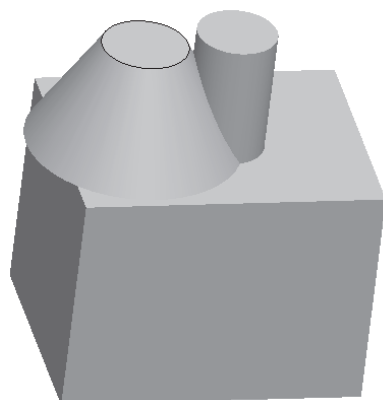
Draft created without selecting the *Extend intersect surface* radio button
